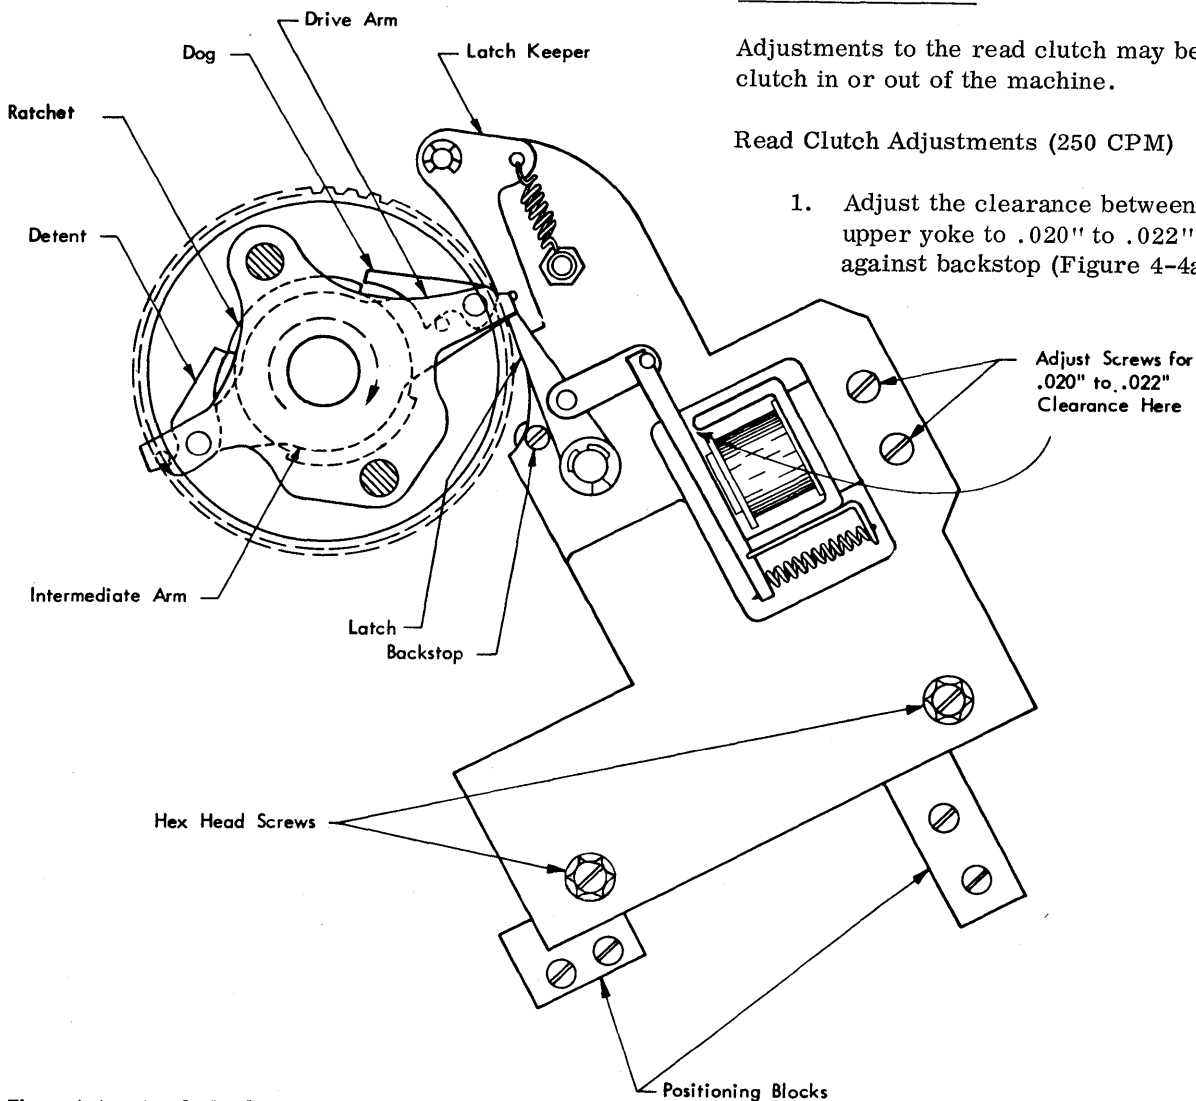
Read Clutch Magnet Assembly Adjustment (250 CPM)
